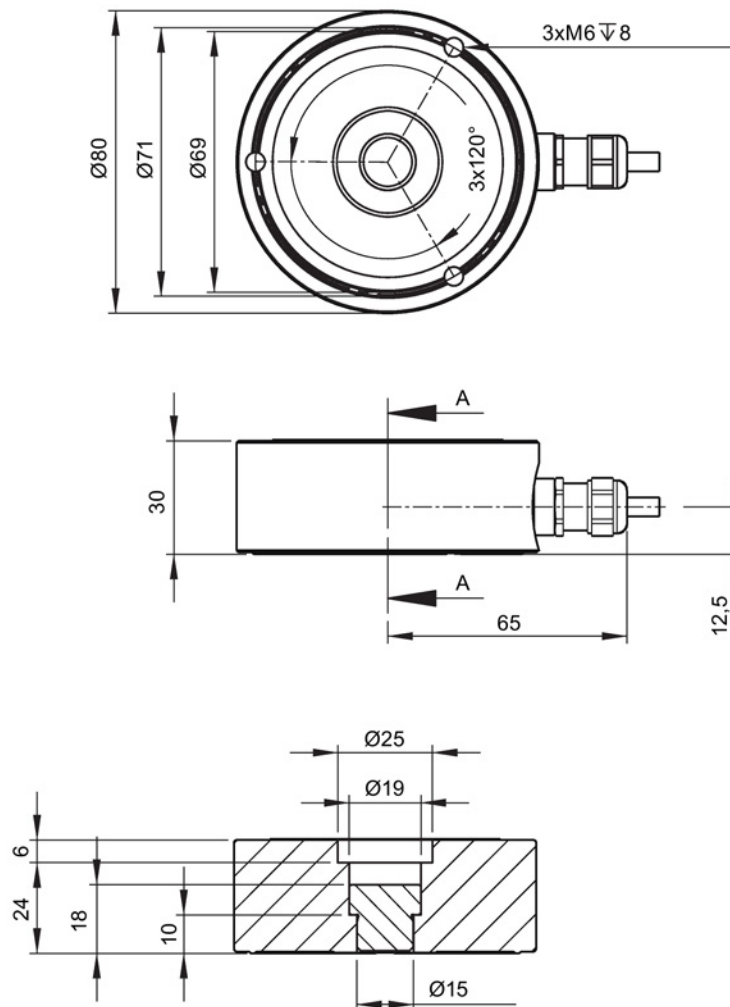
Dimension drawing for SIWAREX WL280 RN-S SA, rated load 2 t, 3 t, 5 t
